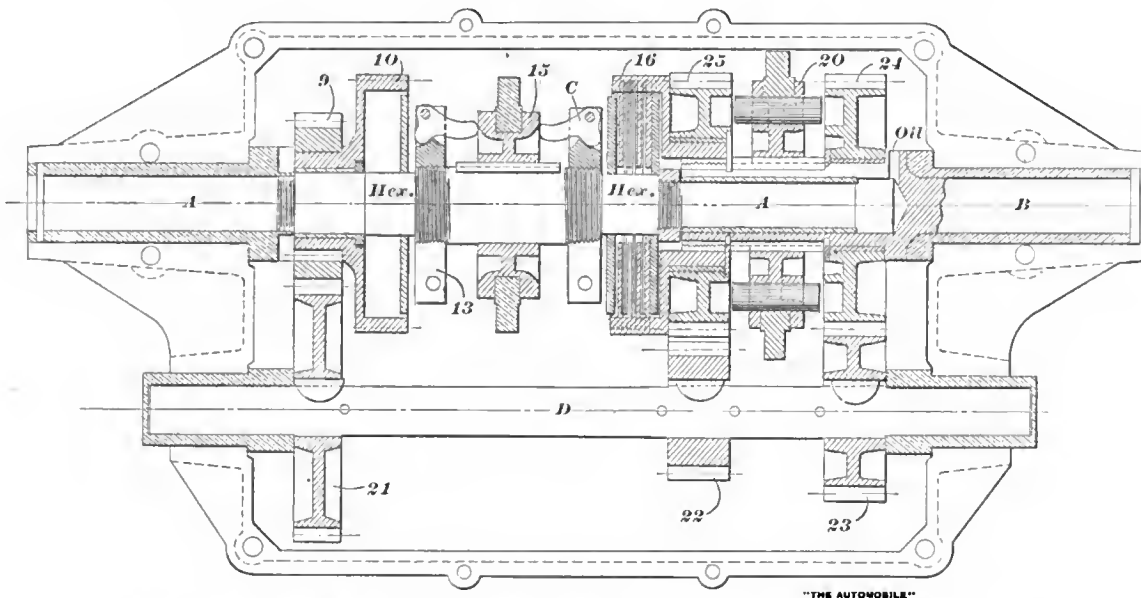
PLAN VIEW IN SECTION OF WELCH INDIVIDUAL CLUTCH CHANGE-SPEED MECHANISM.
